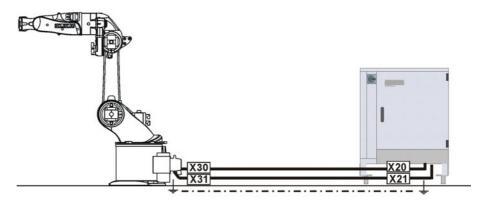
Connecting cables, overview showing KR 16-3 arc HW
